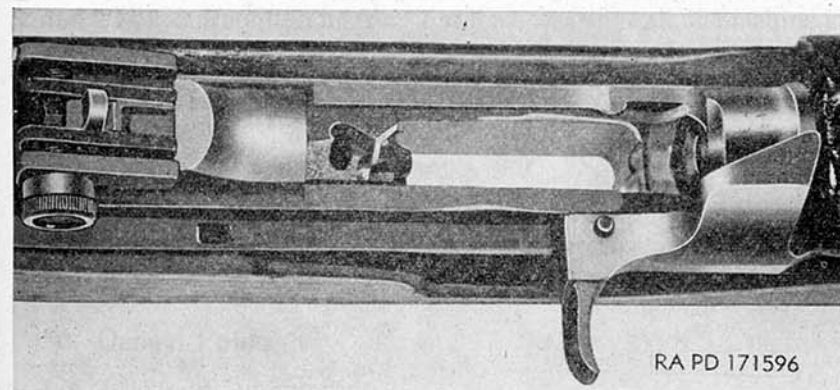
Cal..30 carbine after malfunction caused by firing with cracked bolt.
